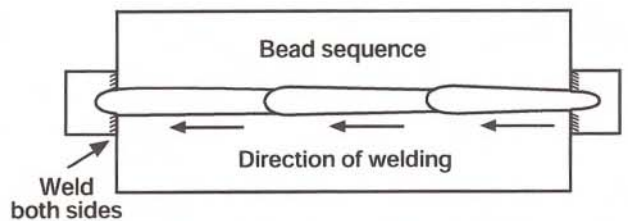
The direction of welding and the sequence of beads is illustrated for the back-step technique. Note the tabs on each end of the seam—they should be of the same thickness as the workpiece.
